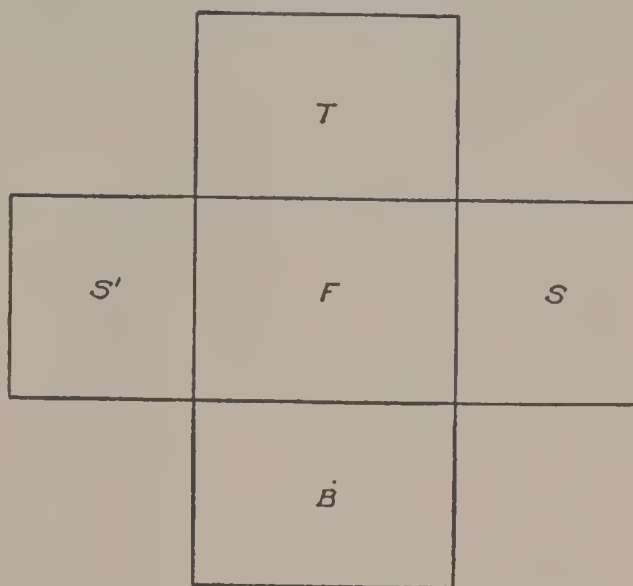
Method of Showing Five Views of a Rectangular Block on a Plane Surface
